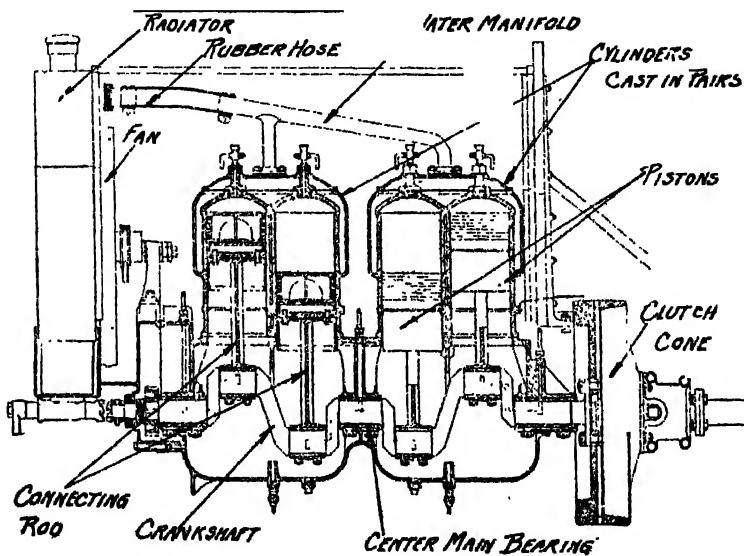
Longitudinal Sectional View of Locomobile Four Cylinder Motor Which Has Cylinders Cast in Pairs and a Three Bearing Crankshaft.
